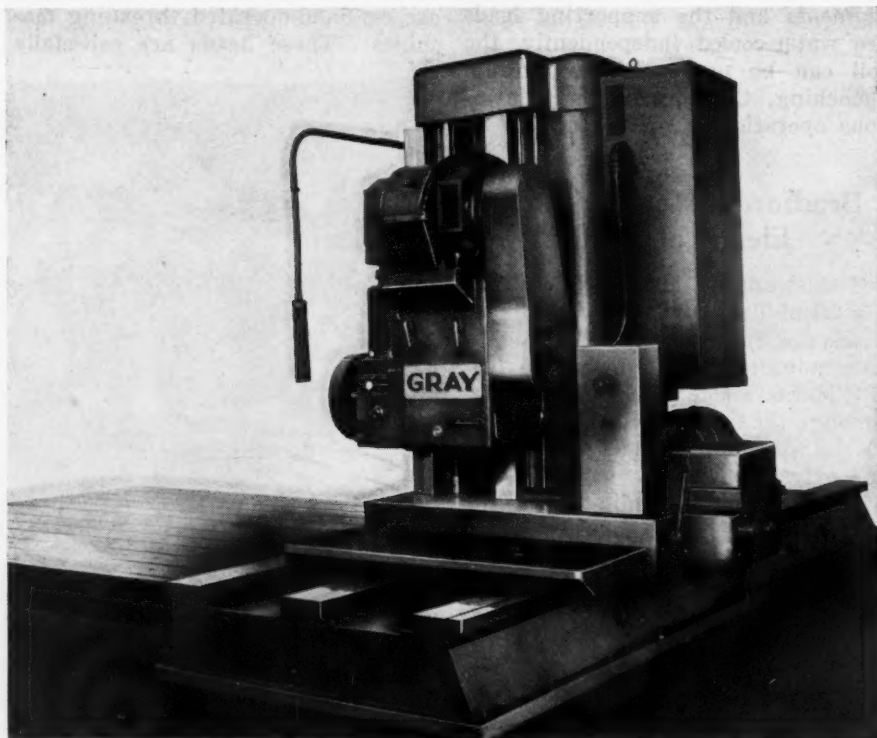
Gray Traveling-head Milling Machine with Floor Plate
